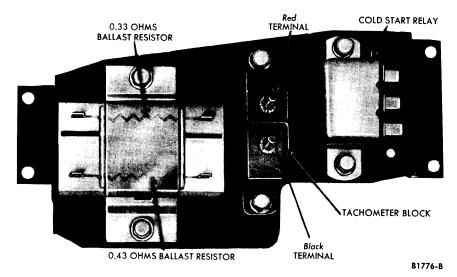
Ballast Resistors, Tachometer Block and Cold Start Relay With Cover Removed—Typical
